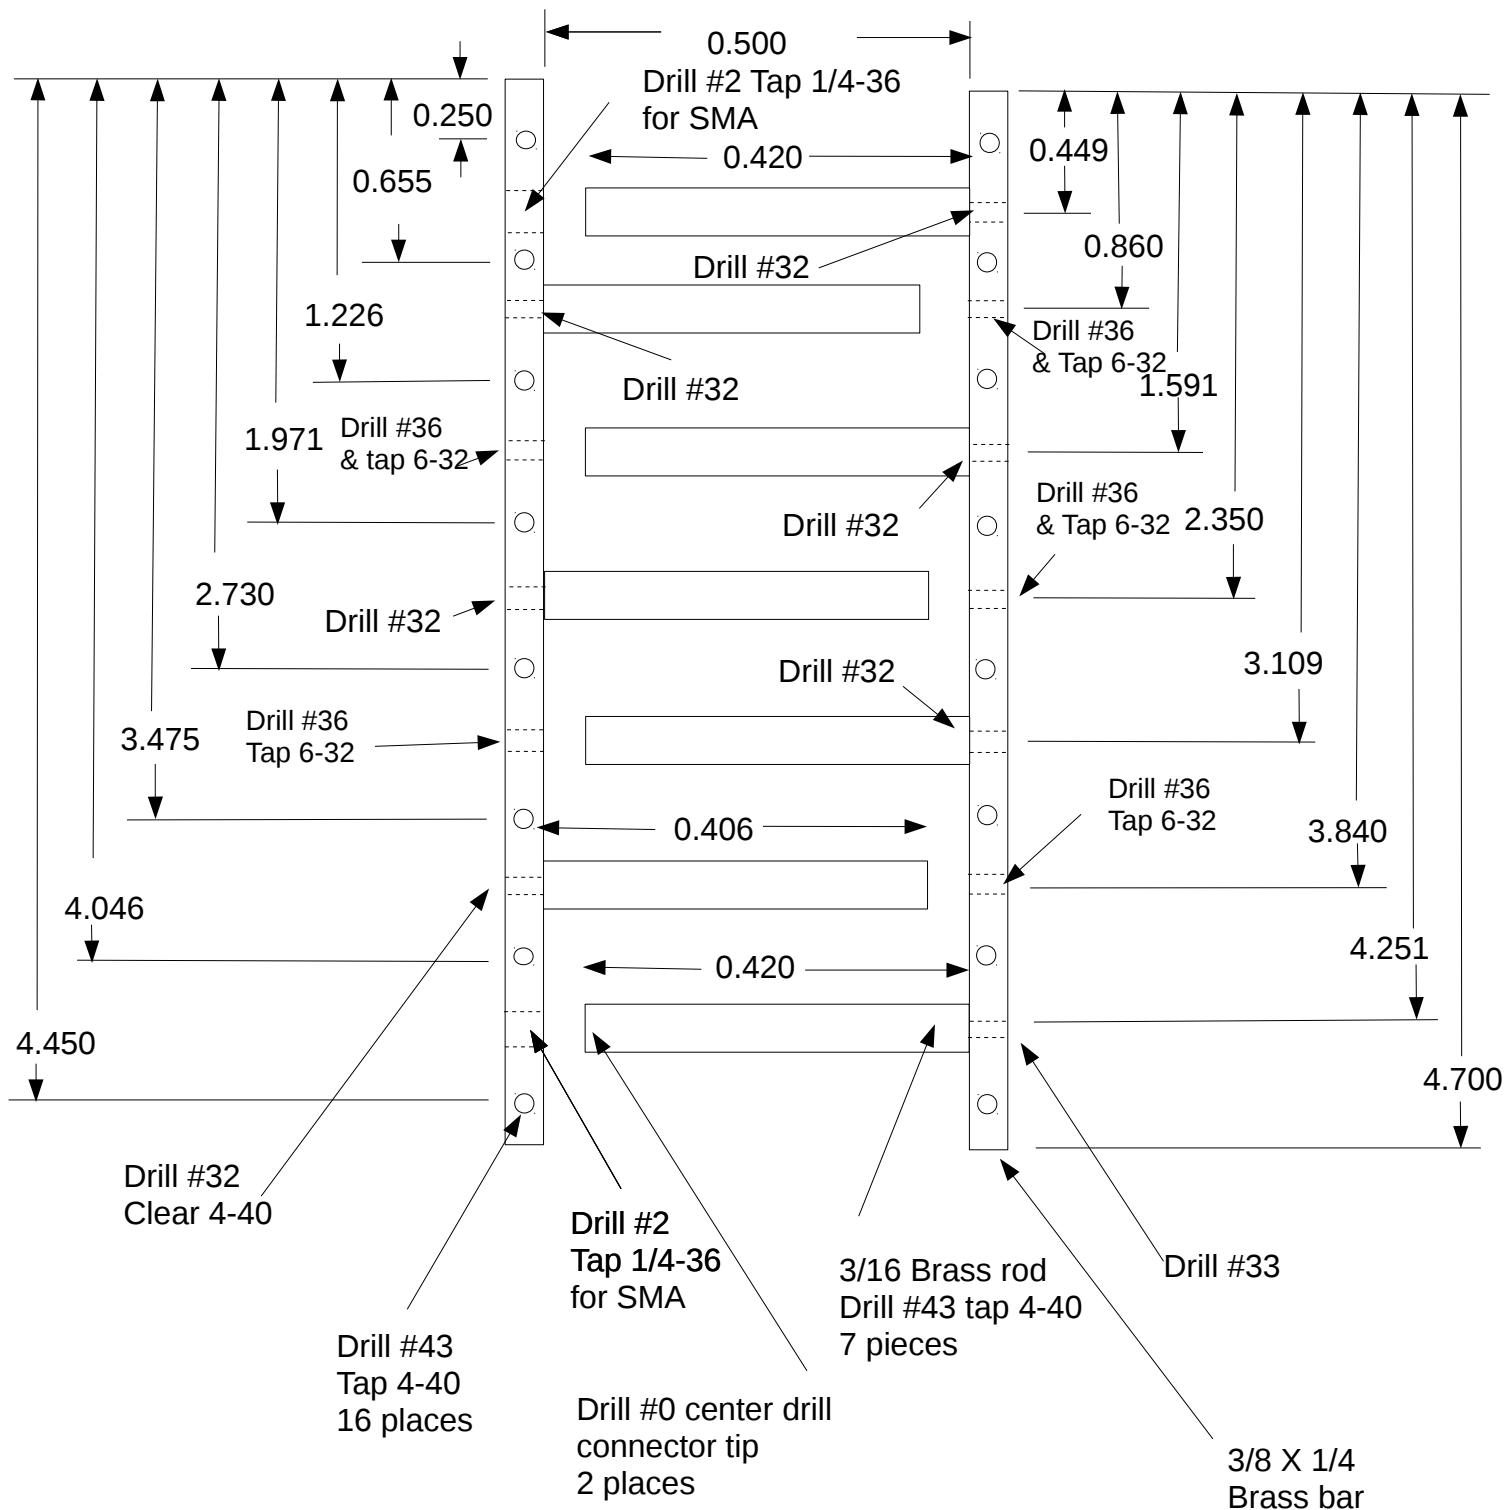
Mechanical drawing for 5760 MHz test filter. While not specified in the drawing, the edge and side bar holes are located along the bar and side center line.
